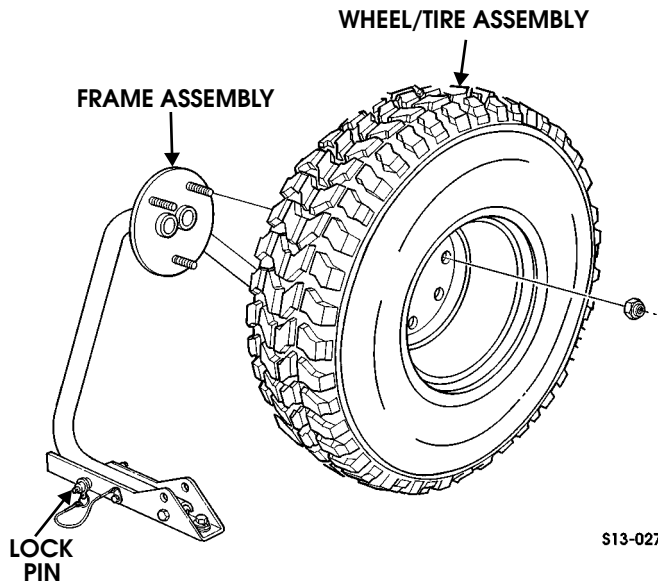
Cargo Bed-Mounted Spare Tire Carrier Appearance
